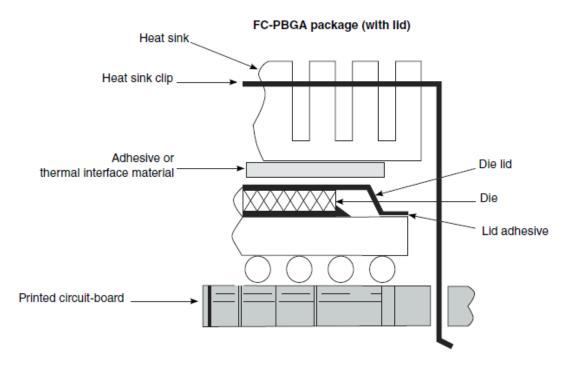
Package exploded, cross-sectional view-FC-PBGA (with lid)
